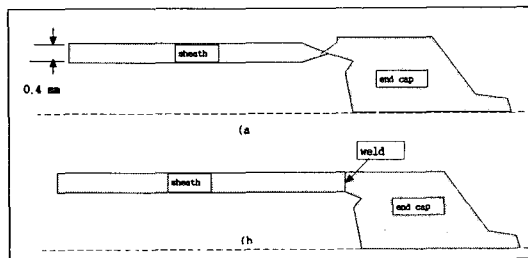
(a) Geometry of the resistance butt welding end cap/sheath
